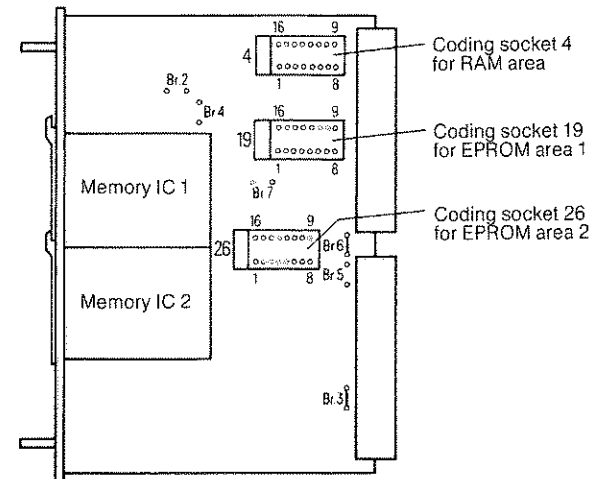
Mounting locations of the jumpers and coding sockets (condition as delivered)
